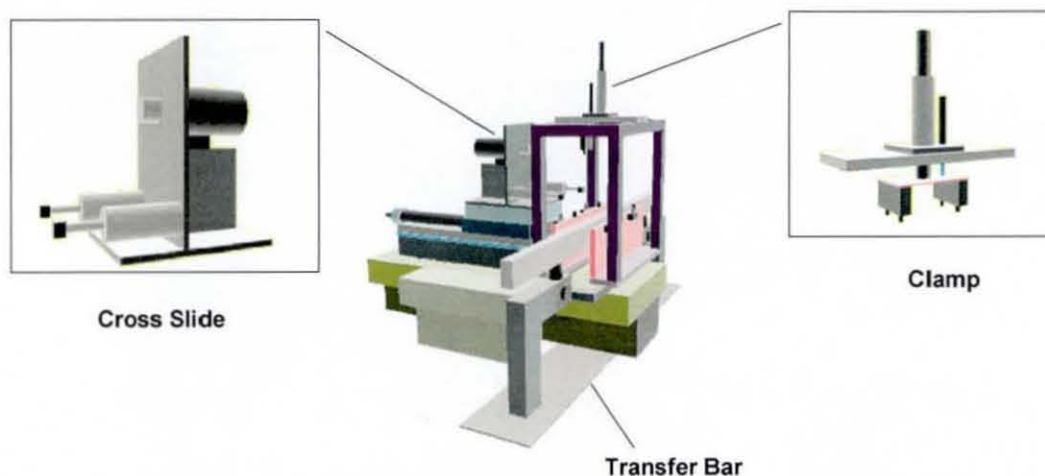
VRML model of Lamb Test Machine showing the different mechanism in the machine
